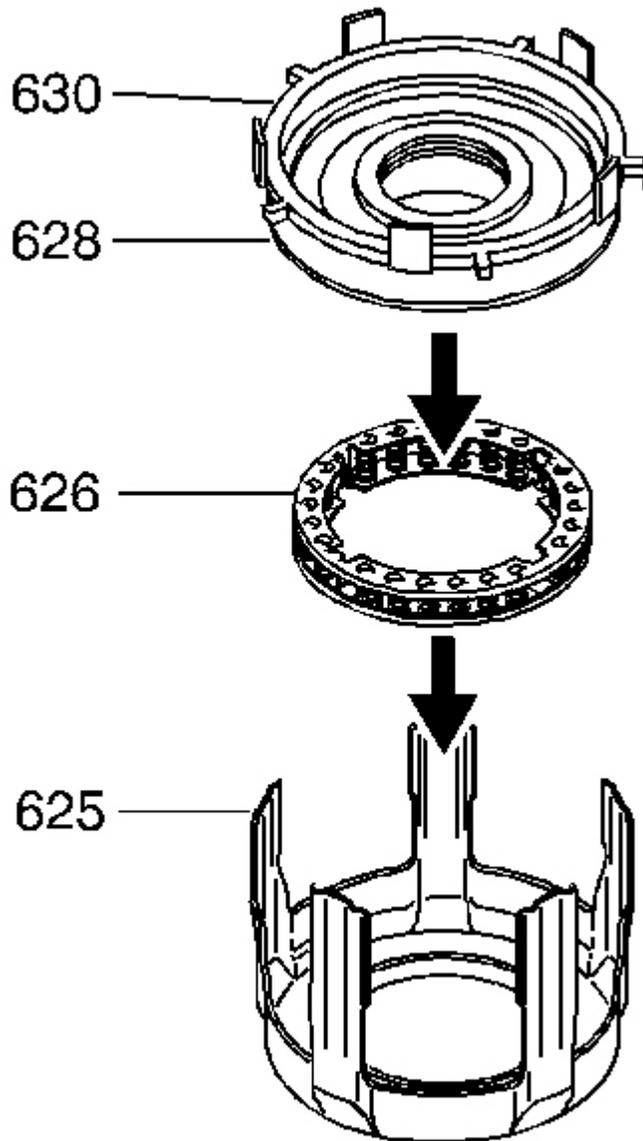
3rd & 4th Spring Assembly & Clutch Apply Ring
